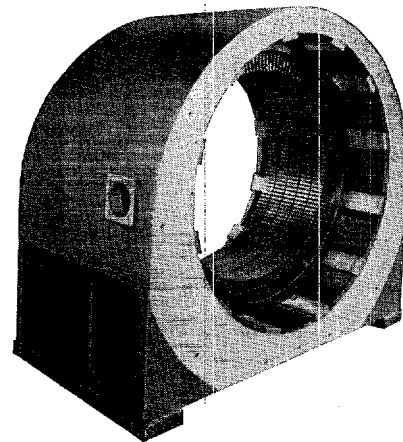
Stator yoke and core for large cage motor ready for winding.
